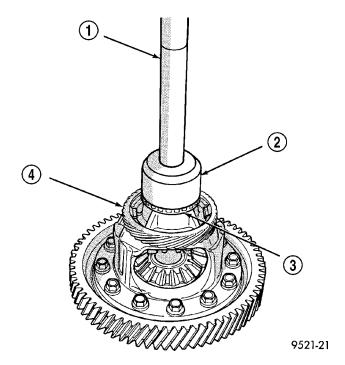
Install Differential Bearing Cone to Diff. Case Side
